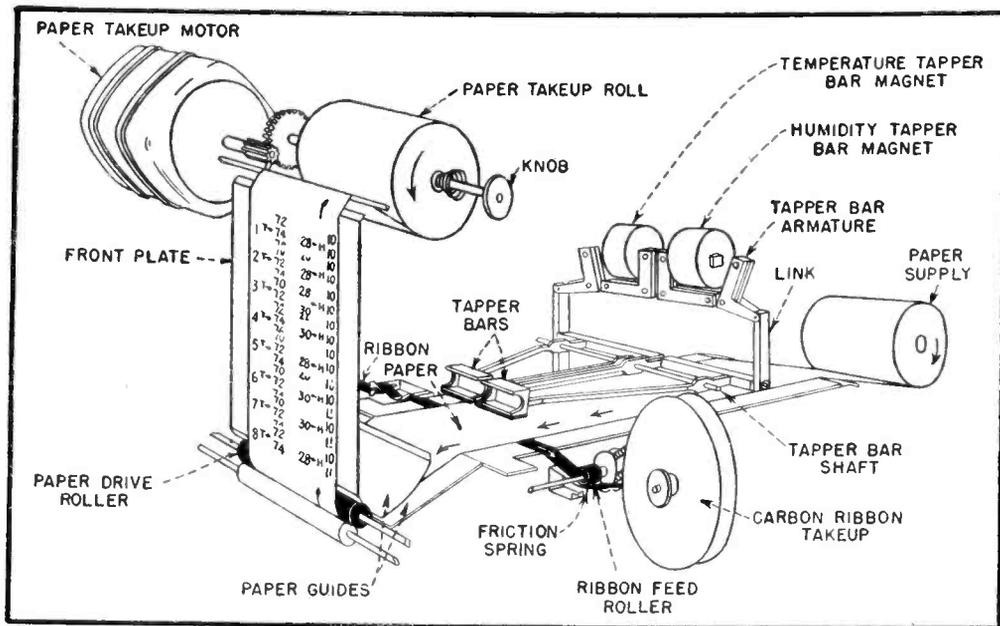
Sketch of the printing mechanism in the electronic recorder, showing how the paper is fed between the printing wheels and the tapper bars
